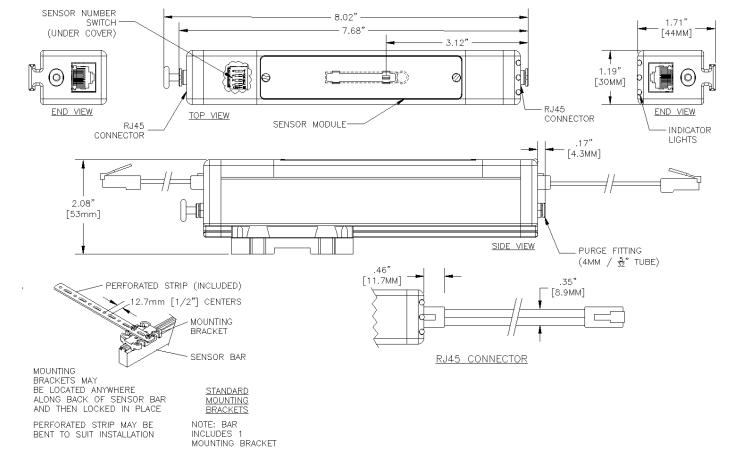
IQ Easy Modular Sensor Dimensions (RJ-45 Connector)
